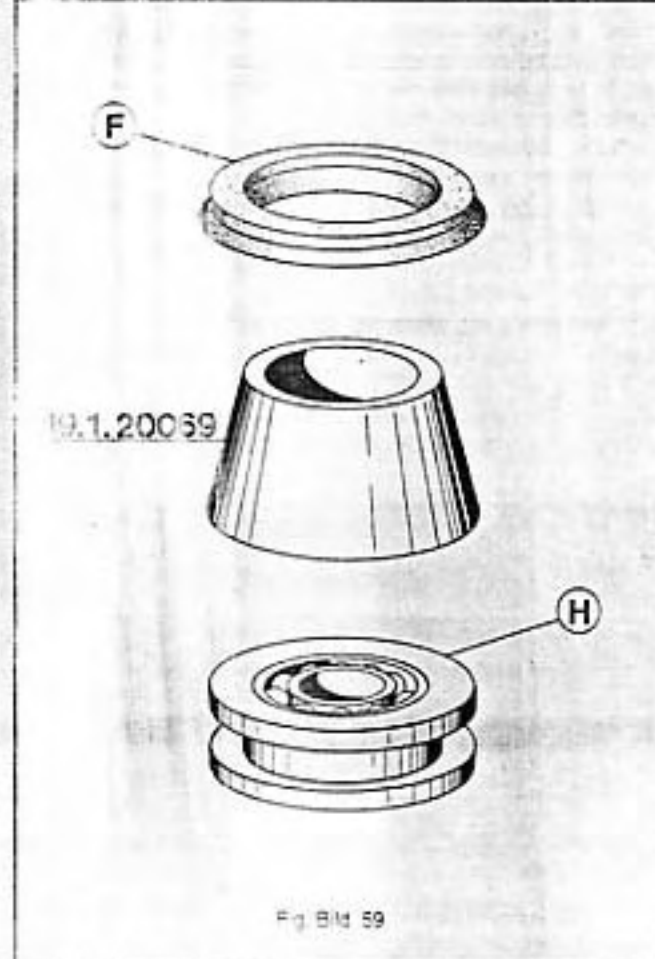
Reassembly: by using an outer diameter 36 mm. tube push up to end of run, after having fitted
